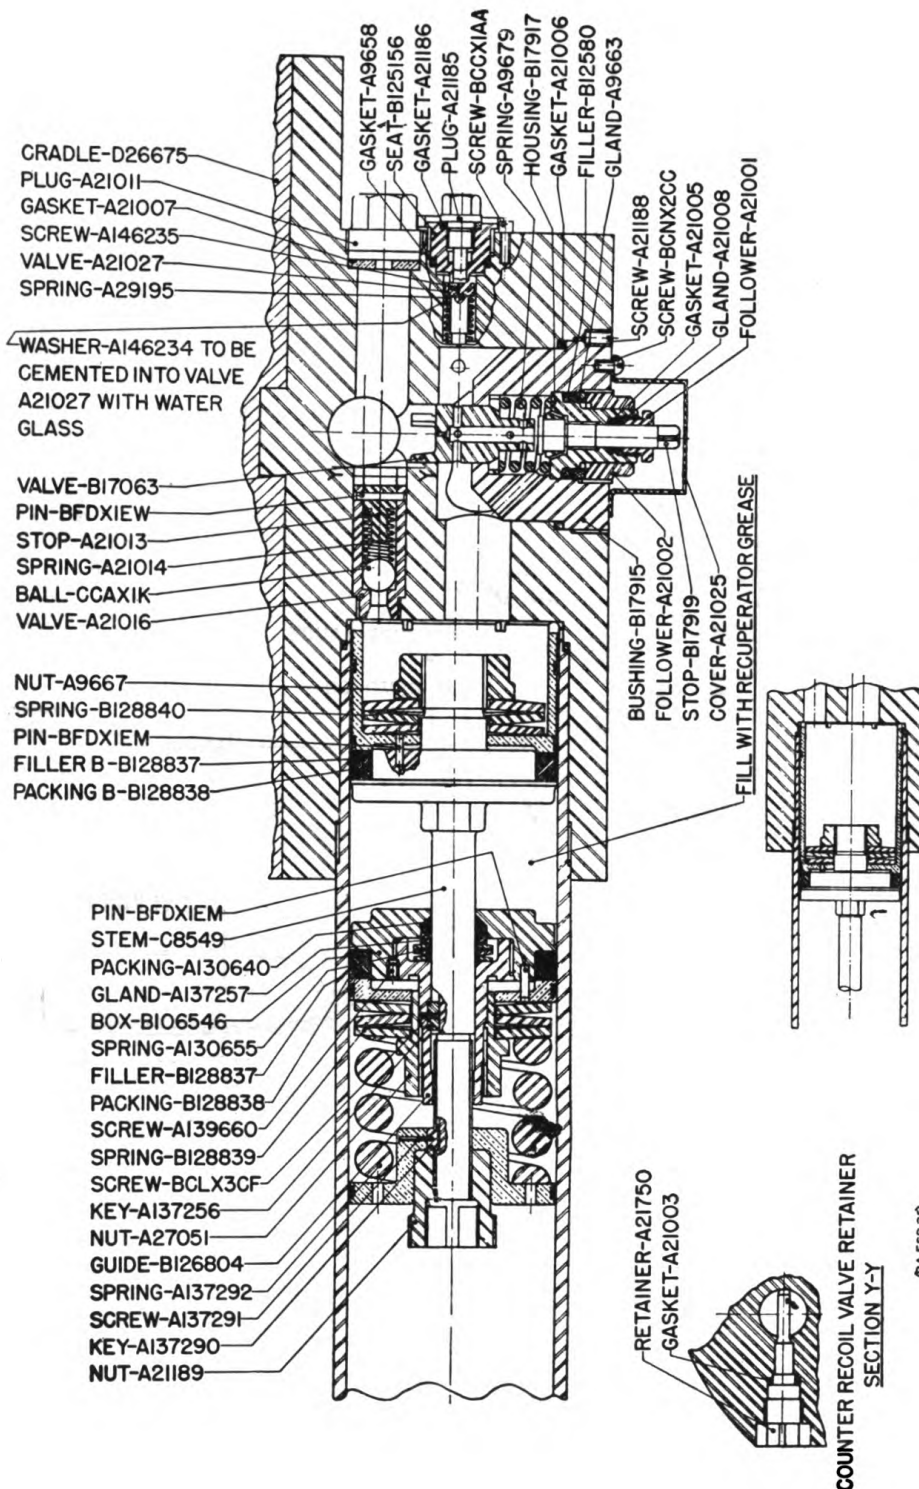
Floating piston and throttling valve, assembly—sectioned views.
